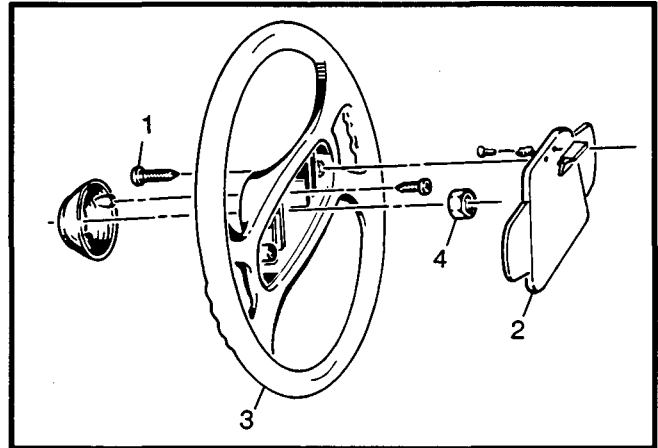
STEERING WHEEL AND SCORECARD HOLDER
